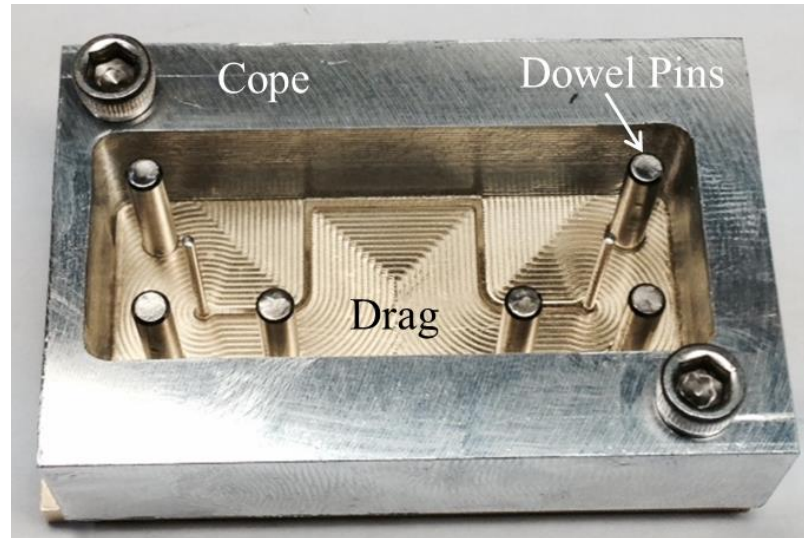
The assembled open mold was comprised of a cope, drag, and dowel pins.
